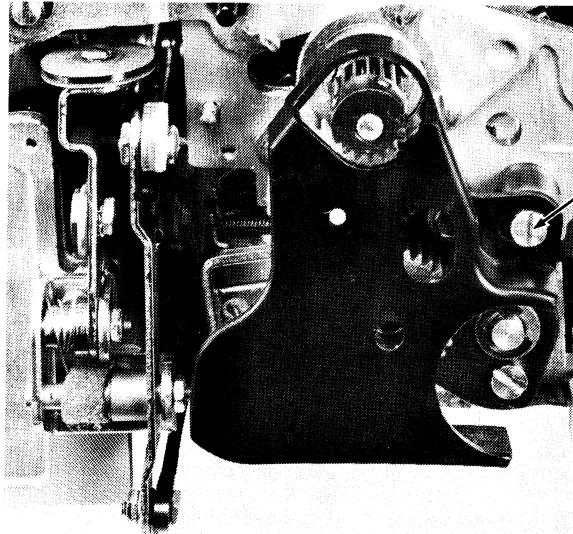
Print Feedback Removal (Left Side of Printer)
